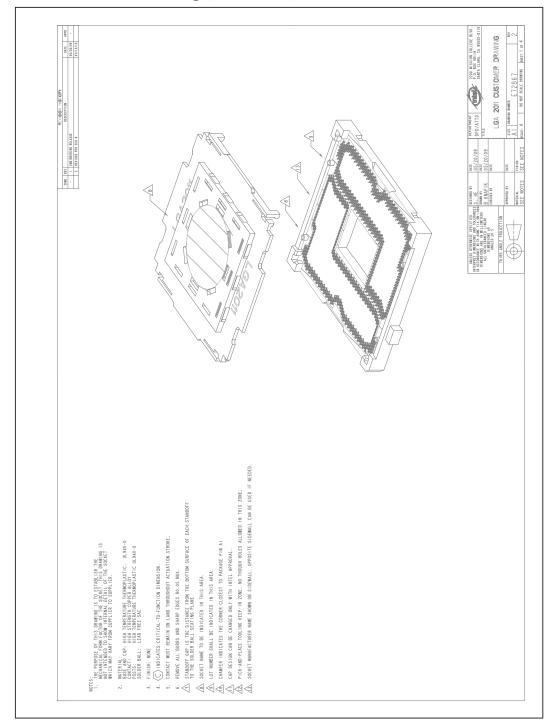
Socket Mechanical Drawing (Sheet 1 of 4)
